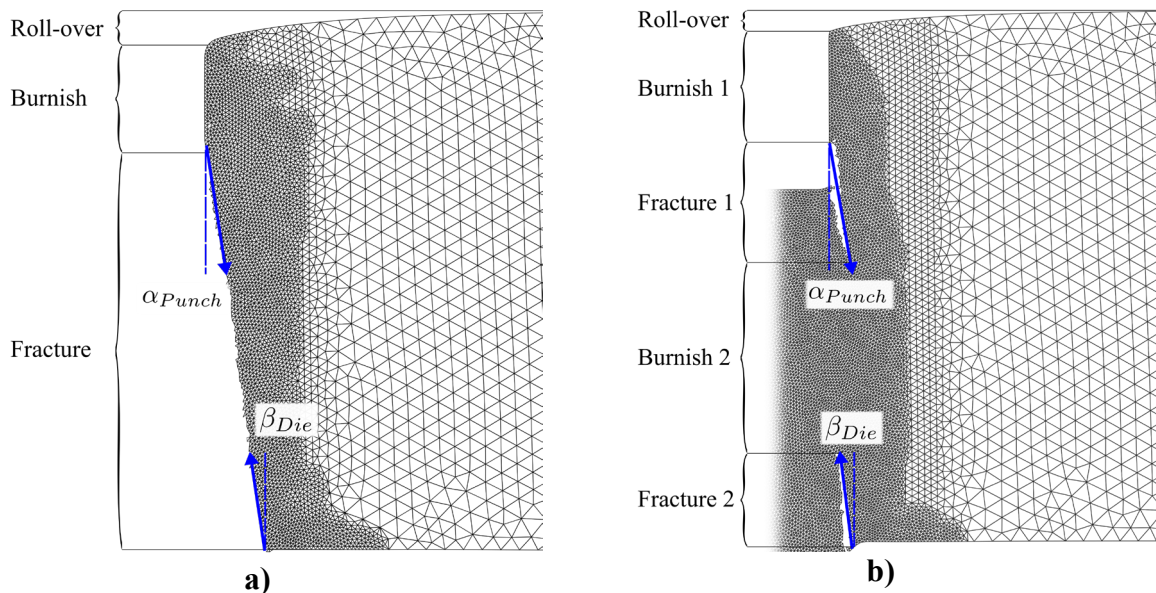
Cut edges a) 12.1% cutting clearance and for b) 5.3% cutting clearance. a) shows the final cut edge where the ordinary cut edge shapes of roll-over, burnish and fracture were distinguished. Here the matching fracture angles ( $\alpha_{Punch}$ ,  $\beta_{Die}$ ) creates a uniform fracture surface. Meanwhile b) shows the mismatching fracture angles ( $\alpha_{Punch}$ ,  $\beta_{Die}$ ) and the corresponding secondary burnish formation. The length of the secondary burnish surface is estimated from the length of Burnish 2.
